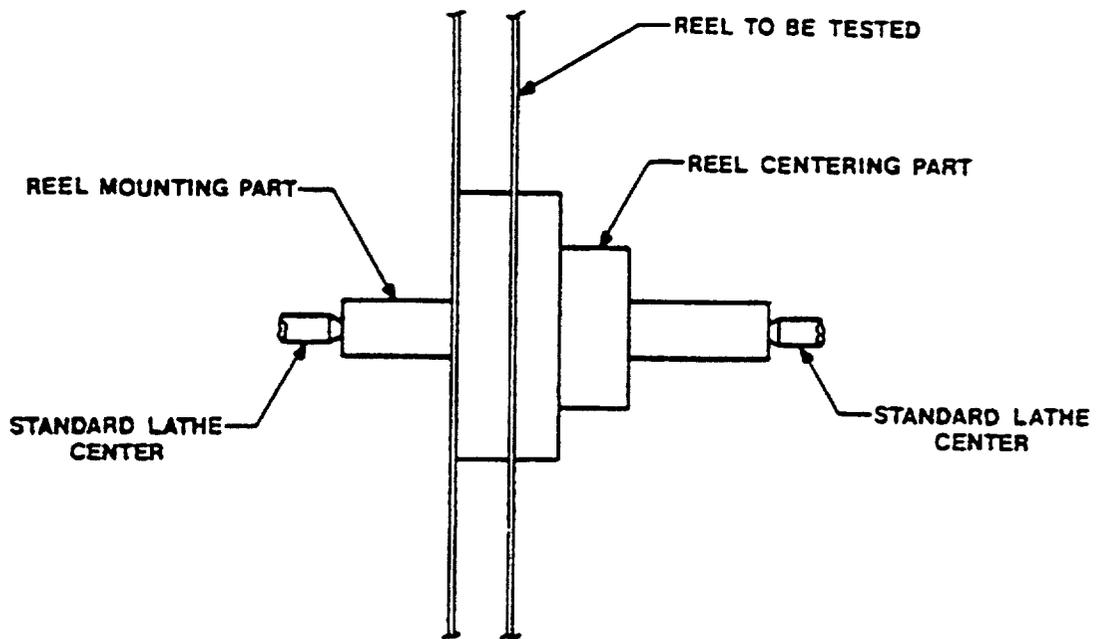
Reel concentricity fixture (3-inch center hole).
